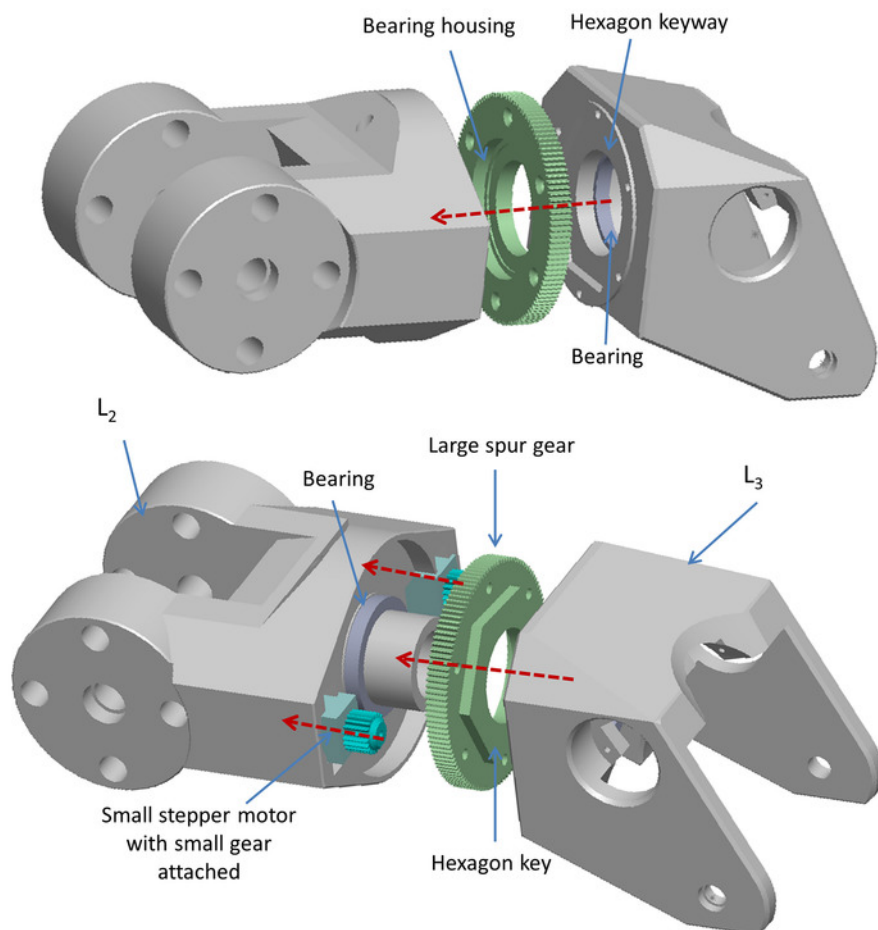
Assembly instruction for J<sub>1</sub>. The required links, motors, gears, and bearings are shown, with some structures changed to transparent to illustrate the assembly. [Please click here to view a larger version of this figure.](#)
